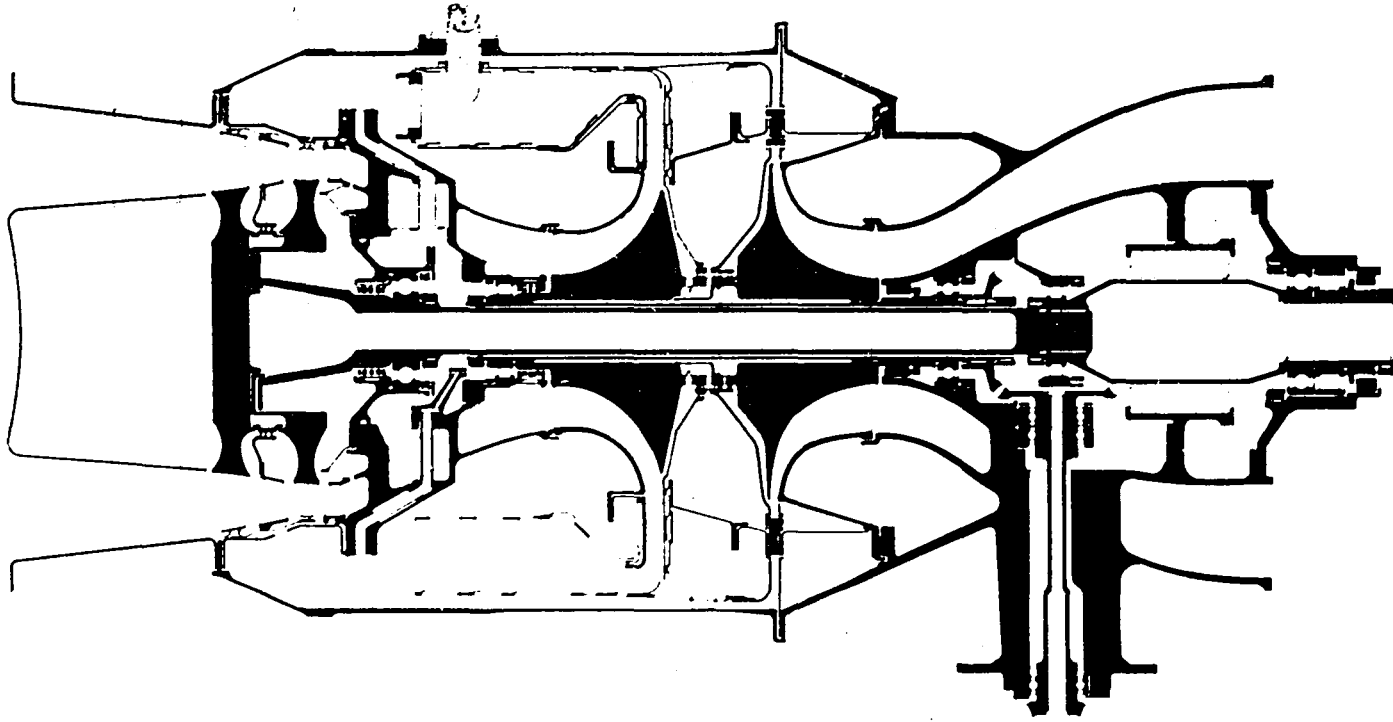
Turboshaft Baseline Engine - TSE Model 1060-1
